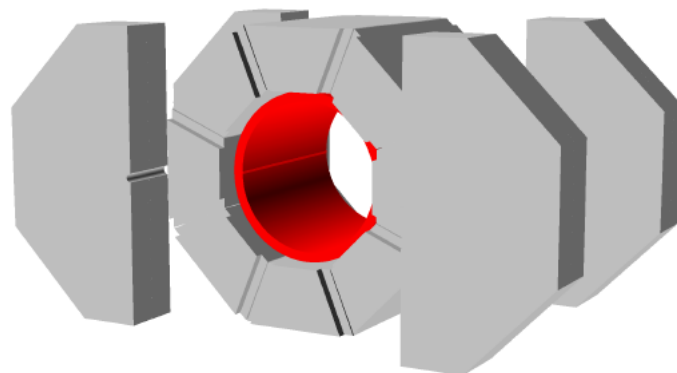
Final configuration with the magnet installed and bolted to RS.
